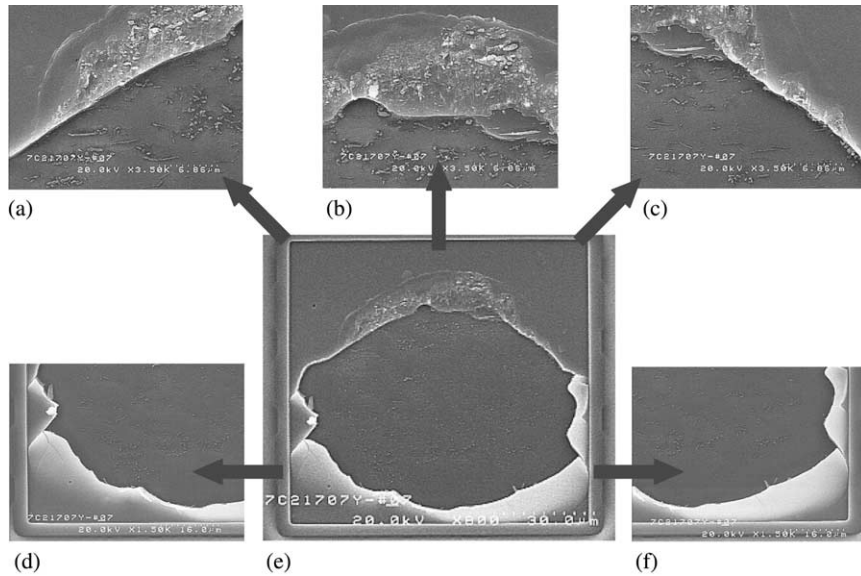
The failed surface of a bonding pad after bond pad metal peeling.
